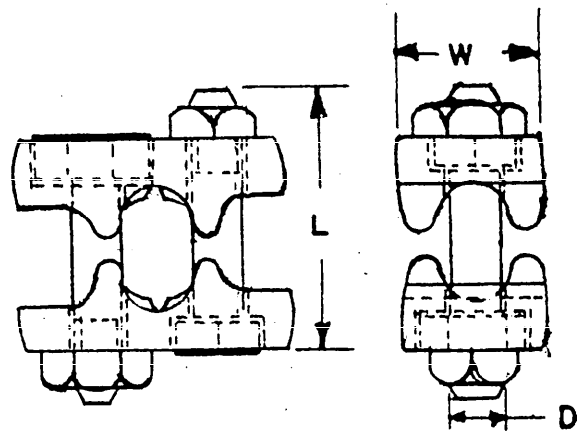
Type III, Class 2, double grip, double saddle wire rope clamp (assembled with separate hex head bolts and nuts).
